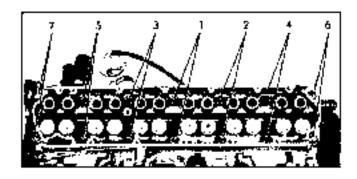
Cylinder Head Locating Dawel Pina
